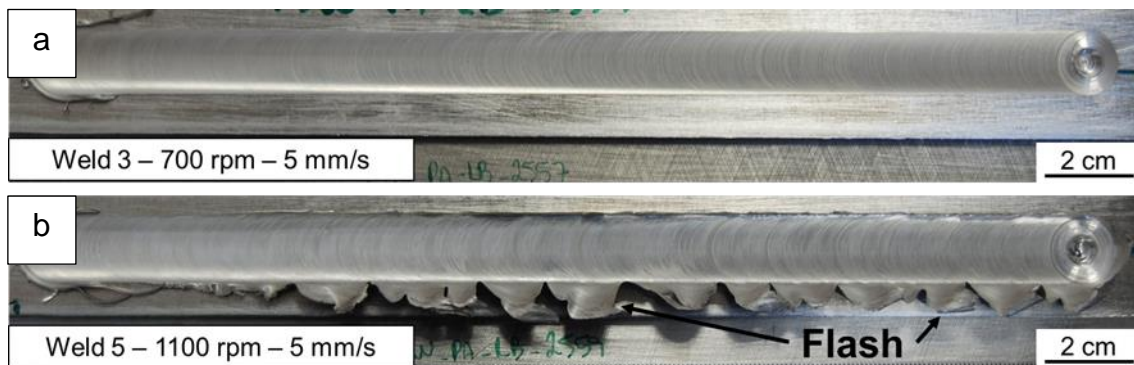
Visual Inspection of the surface of the welds produced by FSW using a welding speed of 5 mm/s and rotational speed of (a) 700 rpm and (b) 1100 rpm.
